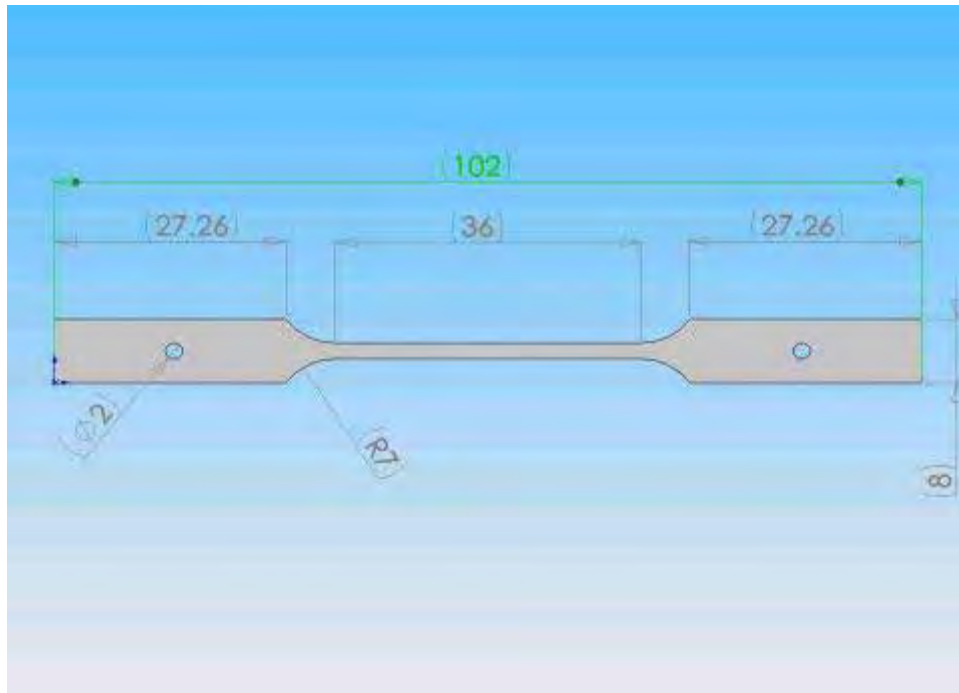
Tensile Test Specimen Geometry and Dimensions
